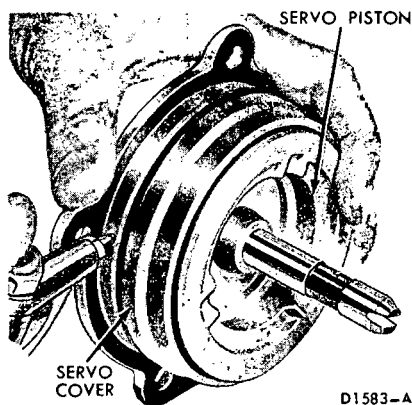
Removing Intermediate Servo Piston—6 Cylinder Engine
